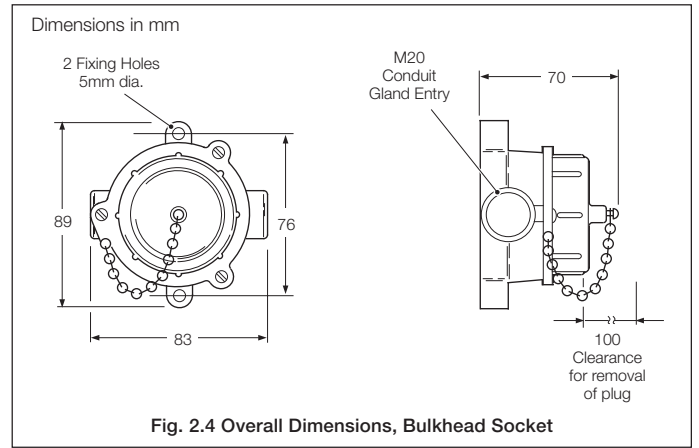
Overall Dimensions, Bulkhead Socket
